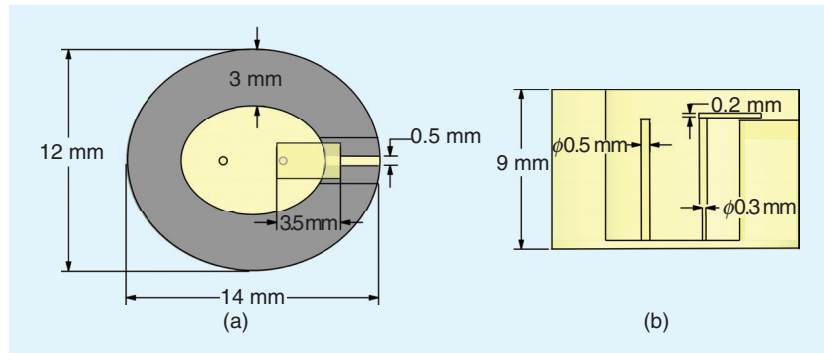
Biohybrid implant dimensions. (a) Top view. (b) Side view.
